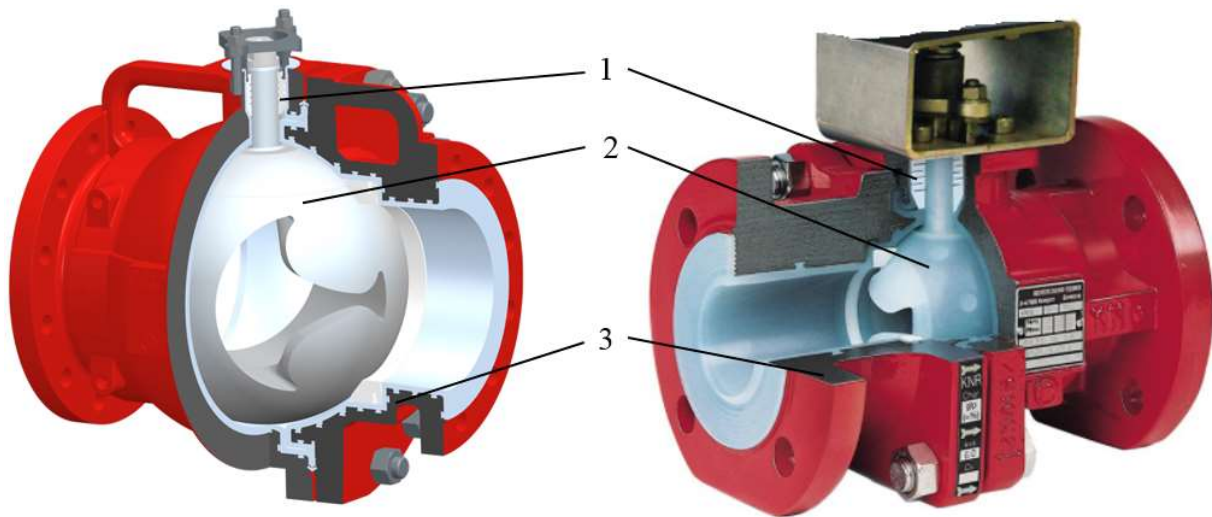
Design of control ball valve with a bellows seal component [99]:
